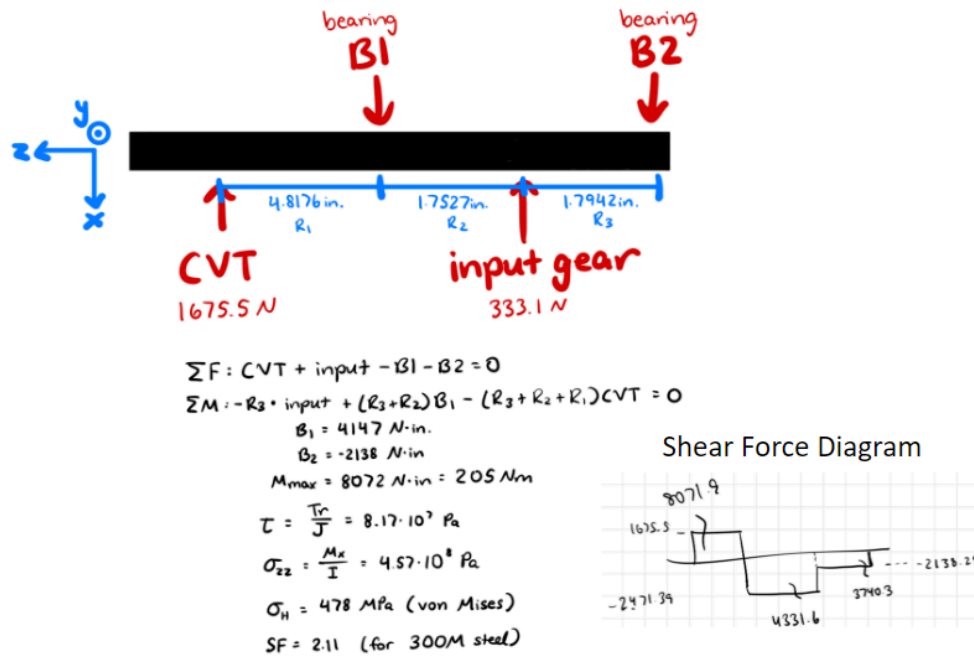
Input Shaft Bending Calculations. The input shaft sees loading from the CVT, input gears, and bearings. We chose to use the low gear input gear for this calculation because the gearbox sees the most torque in this setting so therefore, the input shaft would see the most load from this input gear compared to the rest. A 300M steel input shaft would have a safety factor of 2.11, while a titanium input shaft’s SF would be 1.7 which is well above our goal of a 1.2 SF, so we chose to make the input shaft out of titanium.
